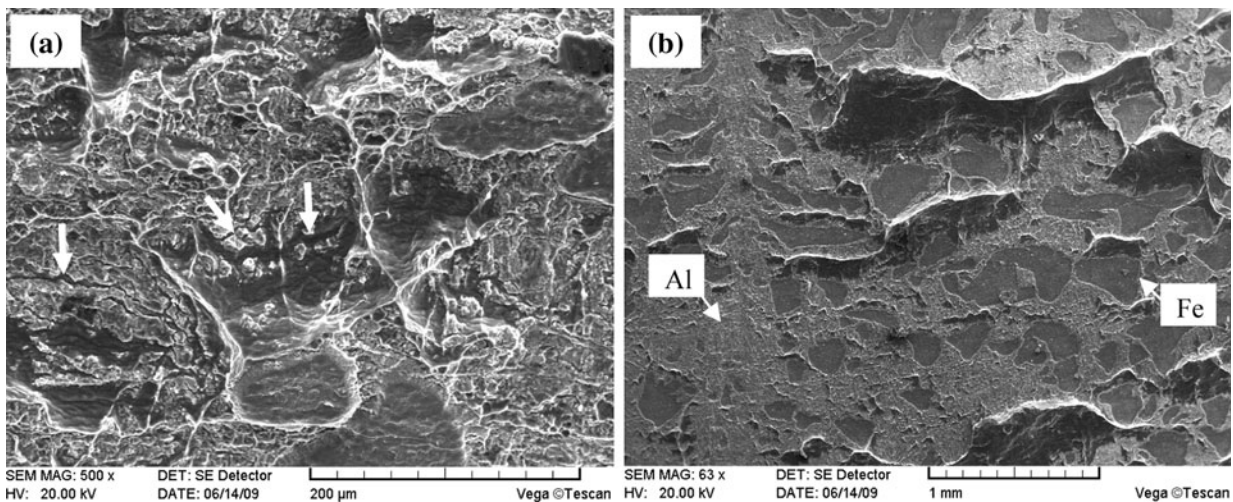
SEM micrographs of the fracture surface after peel test shown in Fig. 8(c) at (a) Al side and (b) steel side.
